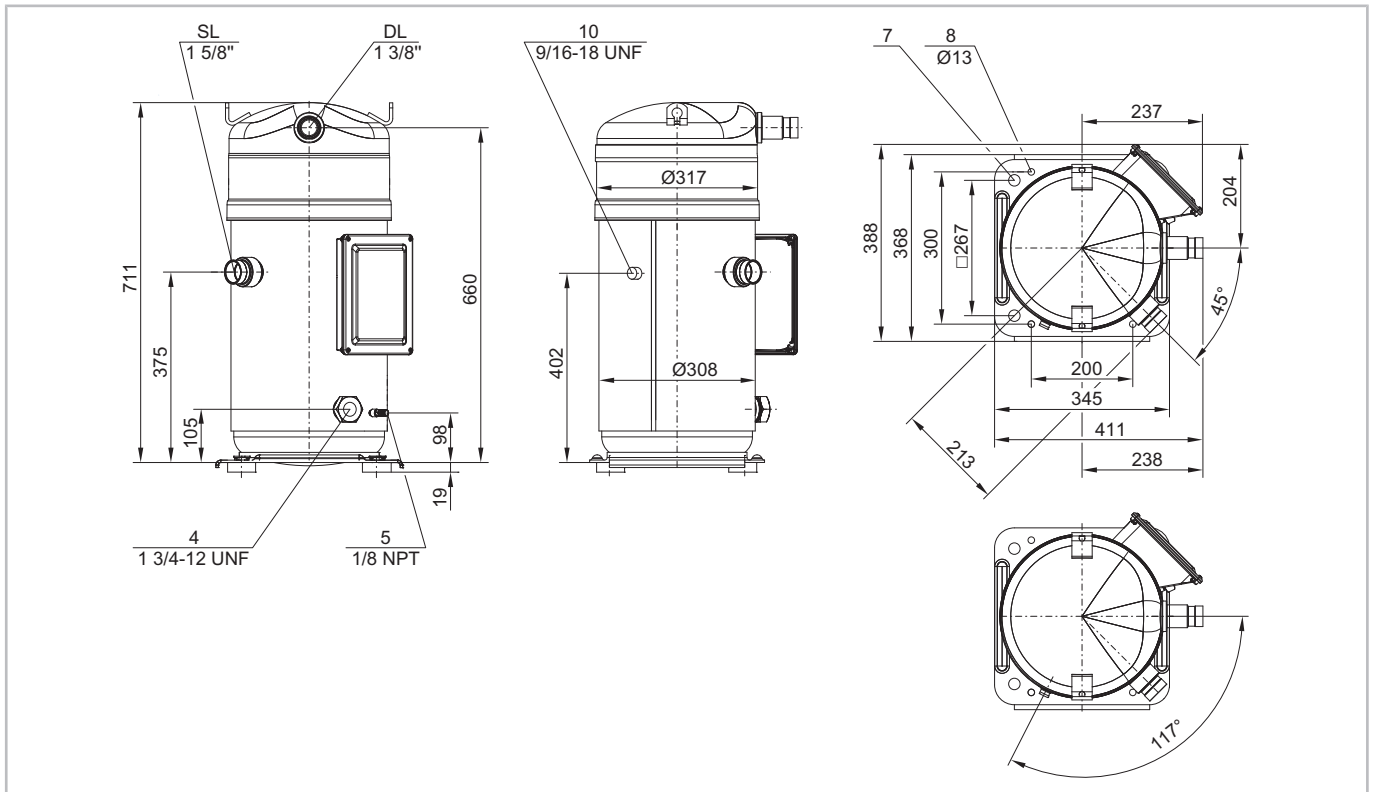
Dimensional drawing ORBIT FIT: GED80295 .. GED80421
